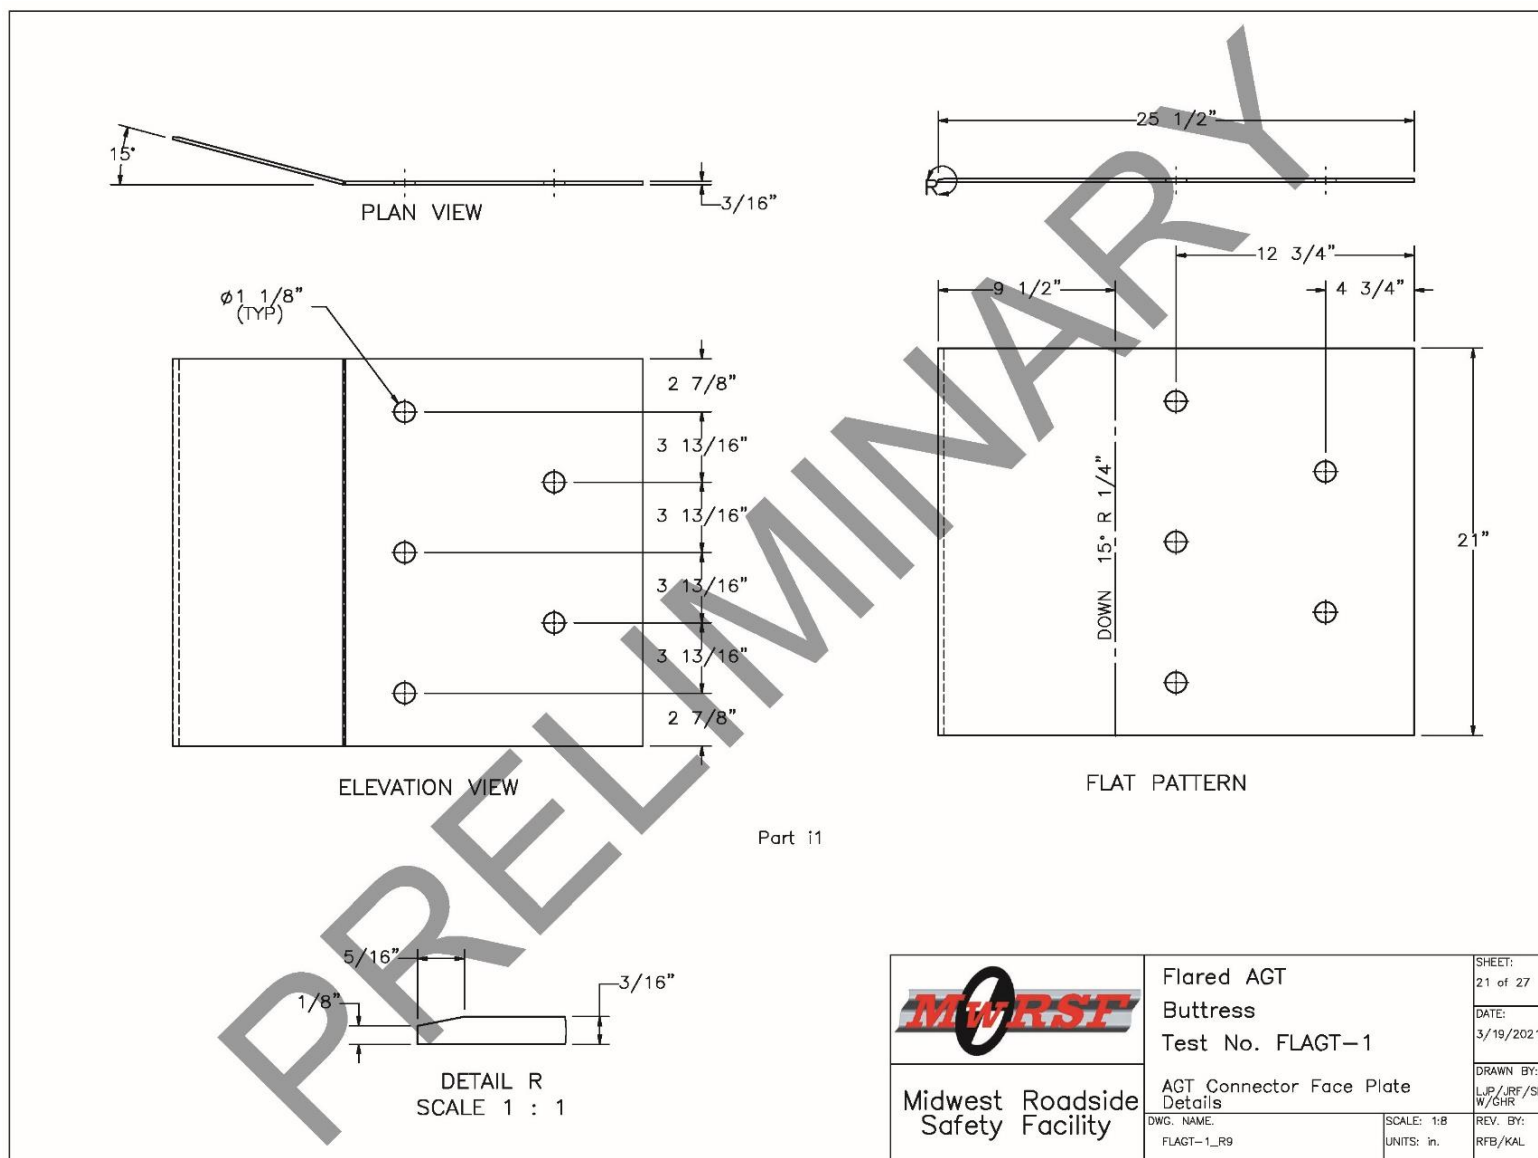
AGT Connector Plate Assembly Face Plate Details, Test No. FLAGT-1
